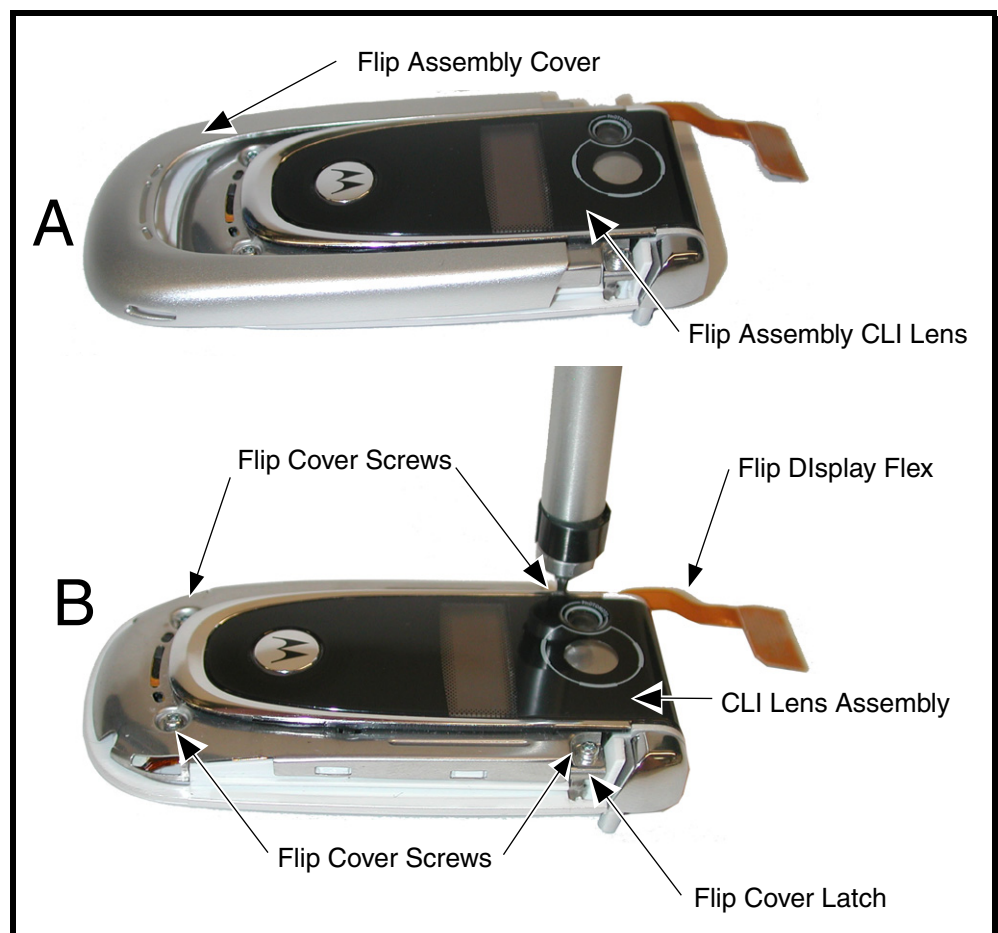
Removing the Flip CLI Lens Assembly Part 1
